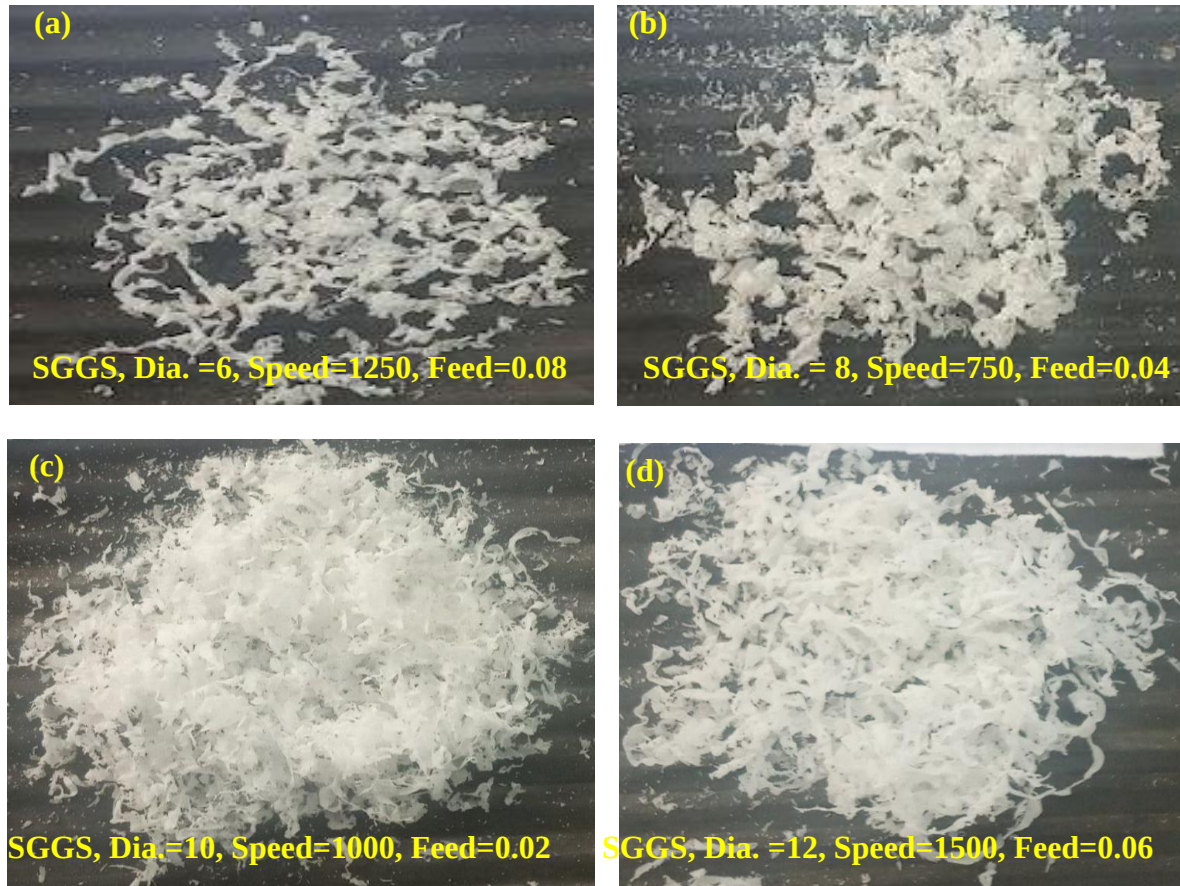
Chip formation during machining of SGGS (1) - hybrid composite
